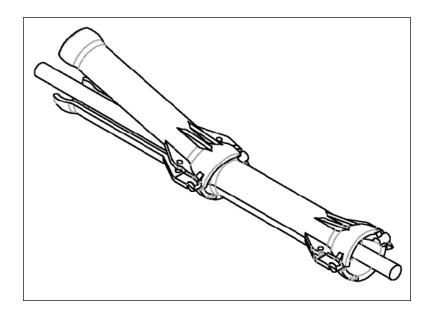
ARTICULATED PIPING TO PROTECT THE SUBMARINE CABLE
